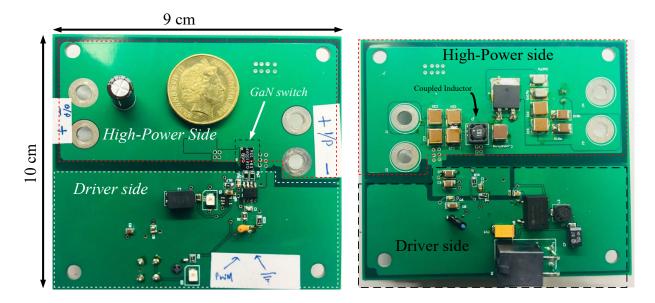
4-layer PCB layout showing isolated driver and power circuitry.
